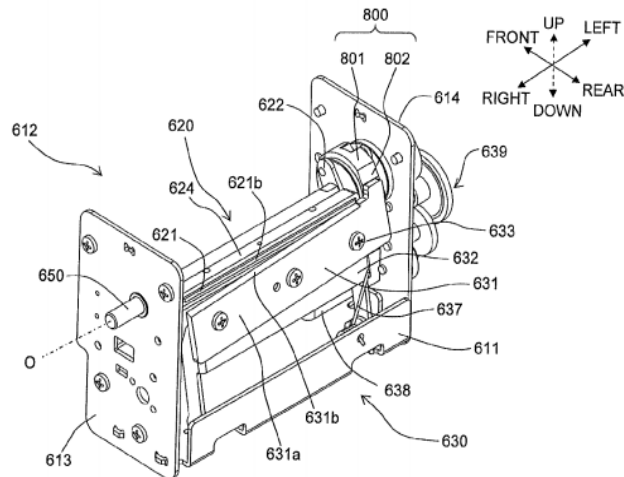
Patent No. 9,415,524 Internal cutting blade components
